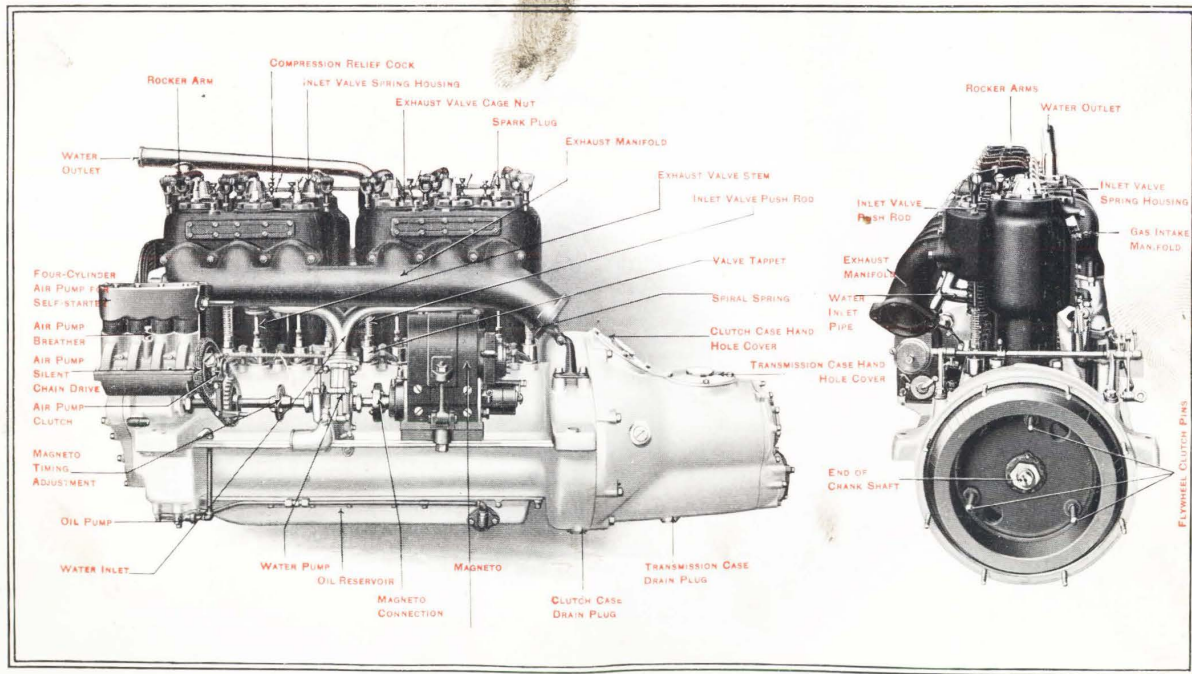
Exhaust Side and Rear of Chalmers "Six" Motor
